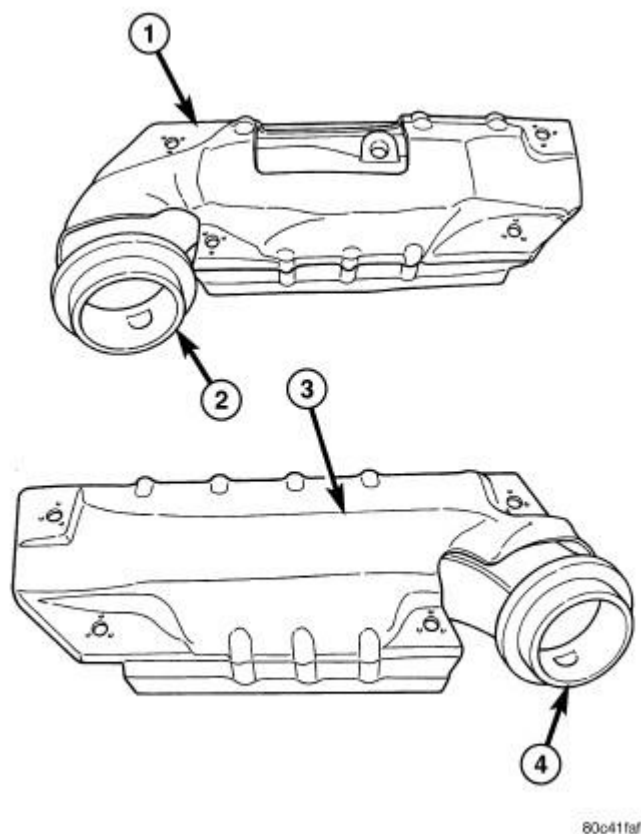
Exhaust Manifold Heat Shields & Flanges
